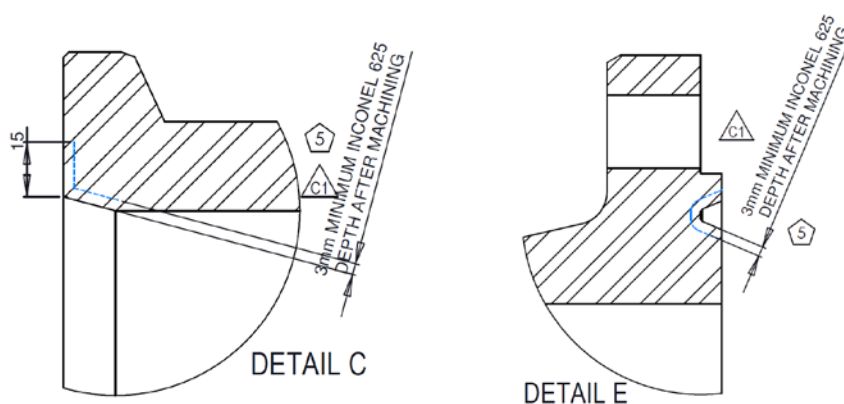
Cladding details on carbon steel seal flanges. Left: Hub type flange connection. Right: Ring type flange connection
